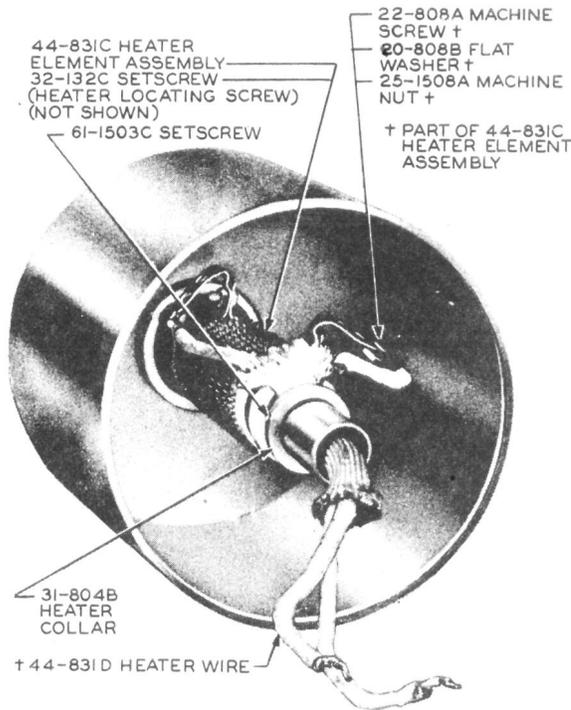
Dryer Drum Heater (Drum Removed From Processor)
